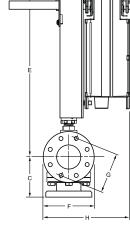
Mx40-717x with Flanged 3-Way Globe Valves
